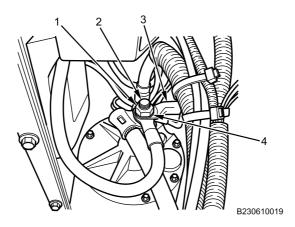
Starter Motor-to-Frame Ground Jumper Cable.
